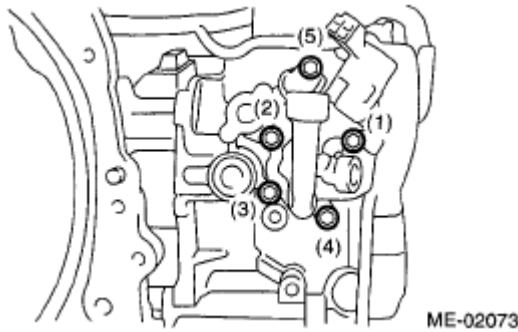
Identifying Oil Switching Solenoid Valve Holder Bolt
